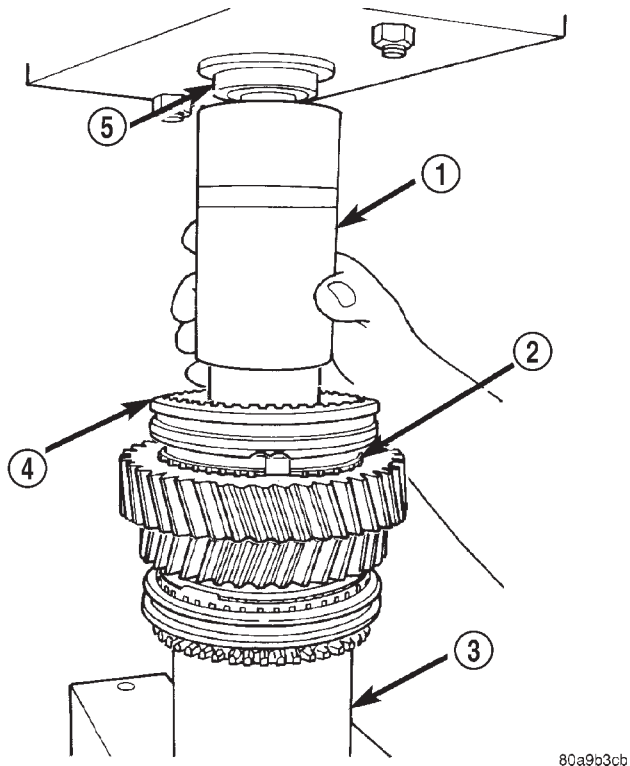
Pressing 1-2 Synchro Assembly Onto Output Shaft
